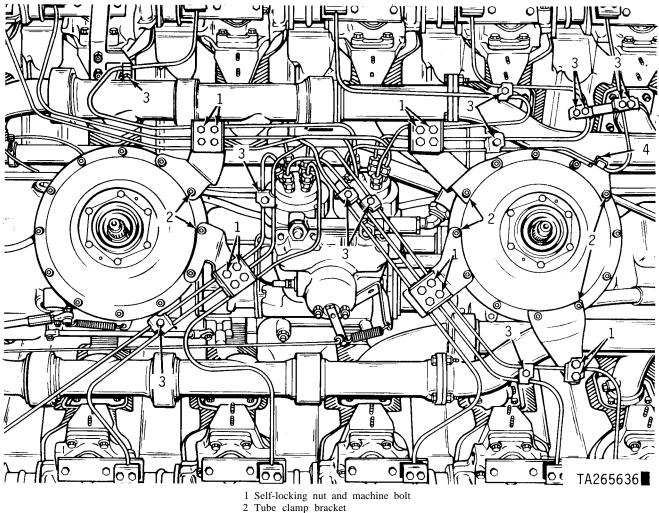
Removing or installing fuel injector left and right bank tube clamps from chmp supports.
